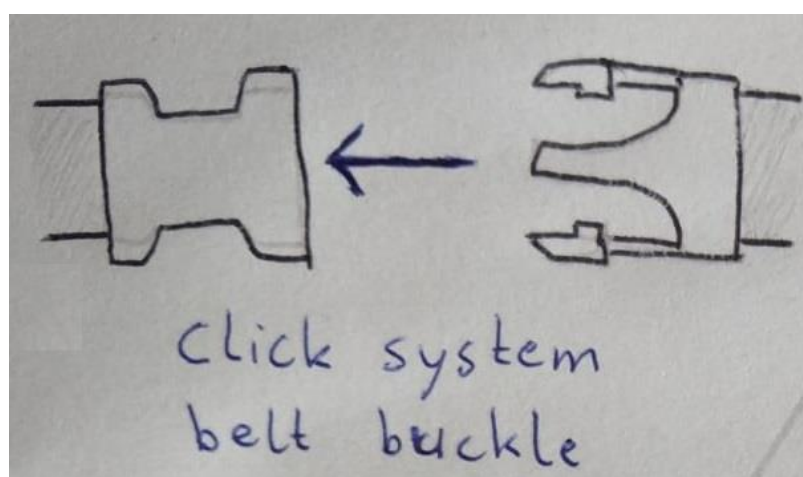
INITIAL ATTACHMENT SKETCH 3
